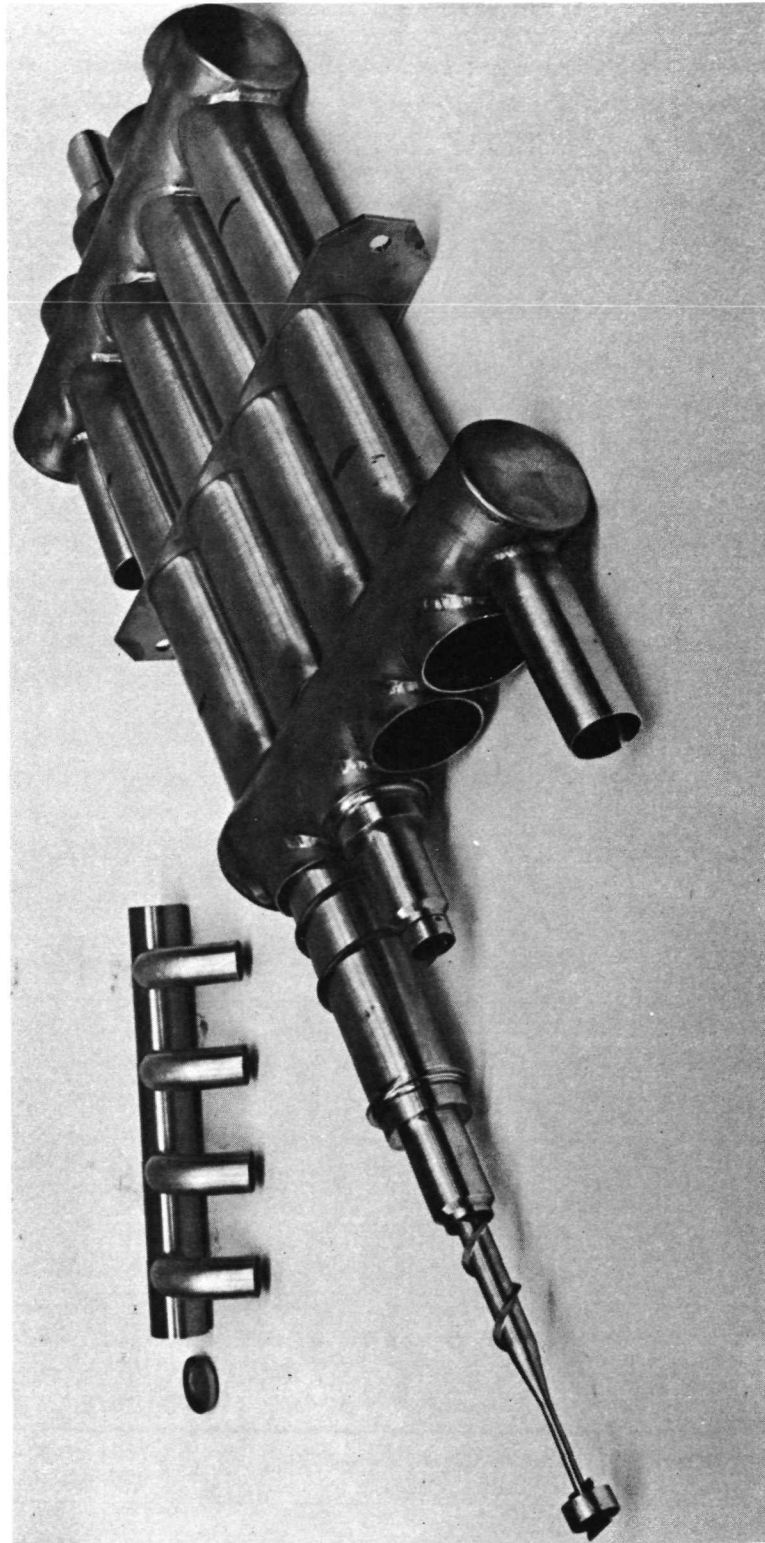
Heat Rejection Manifold and Converter Module Subassembly
